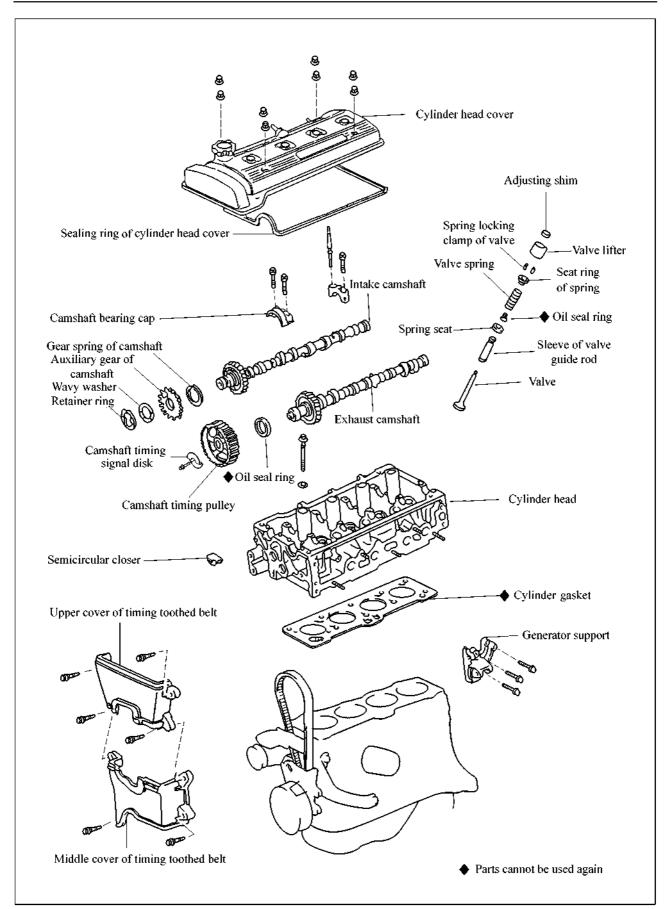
5 -2 Parts Disassembling Ddrawing of the Cylinder Head
